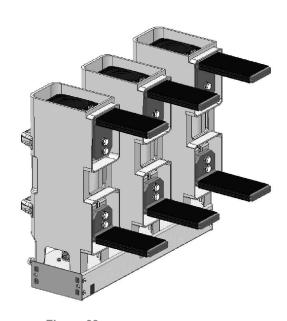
Details of ISM15_HD_1 terminals connection to double rectangular cross-shaped busbars (at fixed installation, for example)
